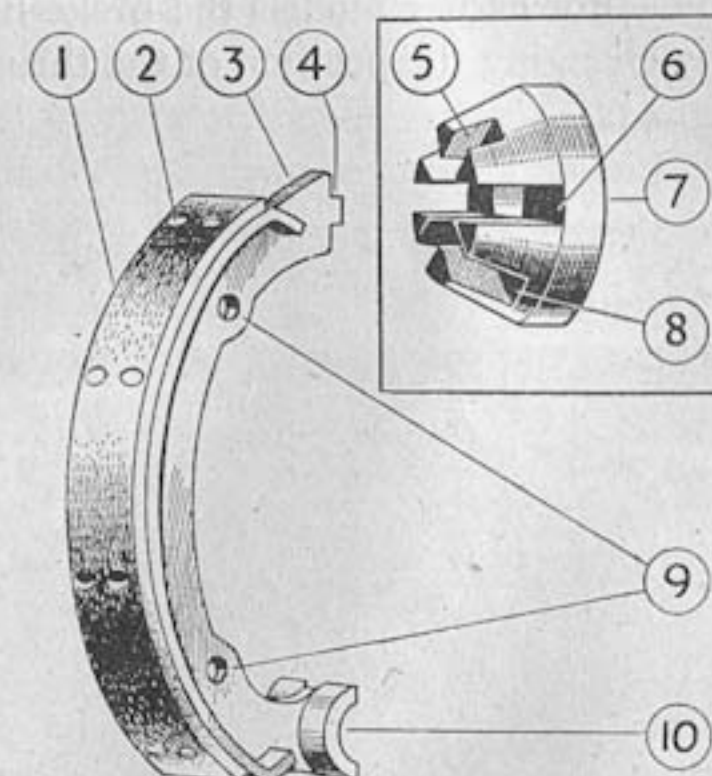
BRAKE SHOE AND THRUST PIECE.
